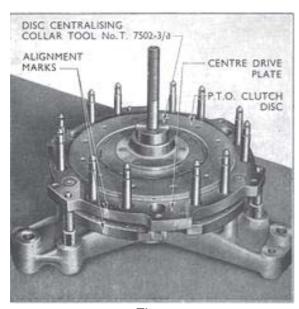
Installation of Centre Drive Plate and P.T.O. Clutch Disc on Assembly Fixture
